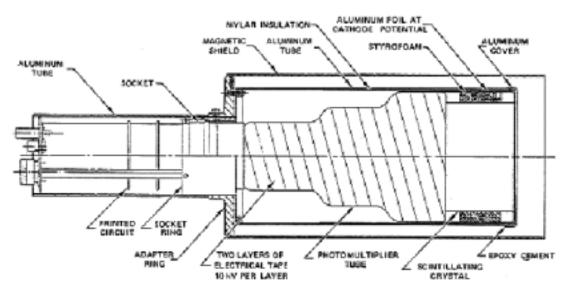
Cutaway Drawing of PM-Scintillator Mounting.
